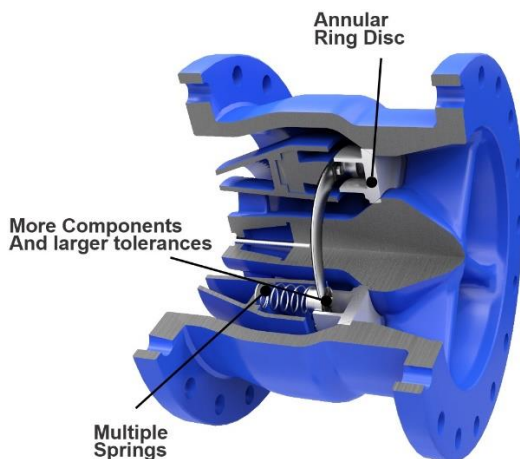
Annular Ring Disc Nozzle Check Valve indicating that the design has more components and multiple springs making it more complex than a Central Shaft Nozzle Check Design
